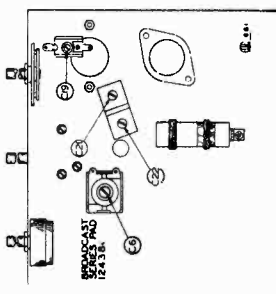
BOTTOM VIEW SHOWING TRIMMERS
